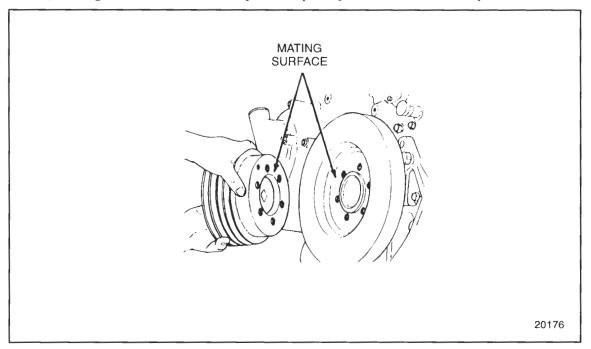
Crankshaft Pulley and Vibration Damper Inner Contact Surfaces
